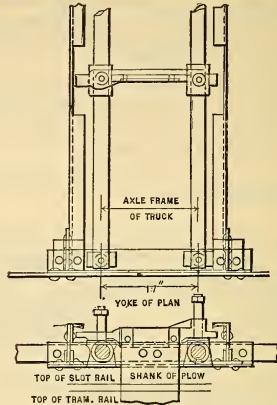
Plan and Elevation of Plow Suspension from Truck, Metropolitan Street Railway, New York. — Standard Work, 1897-98.
